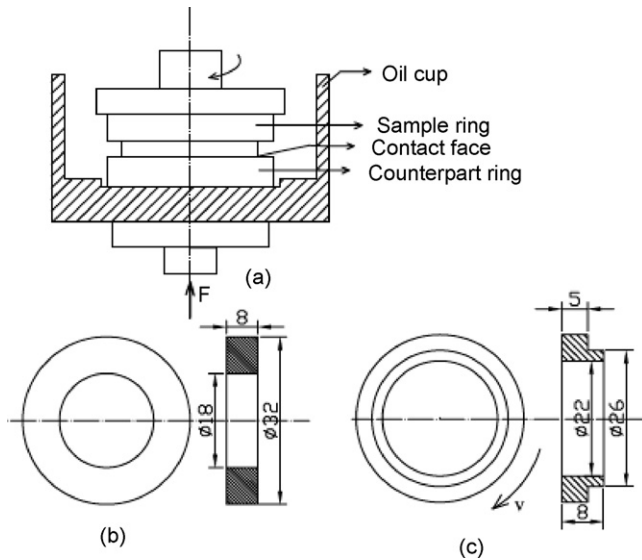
Schematic diagram of frictional contact parts (unit: mm). (a) Ring on ring contact; (b) counterpart ring; (c) sample ring.
